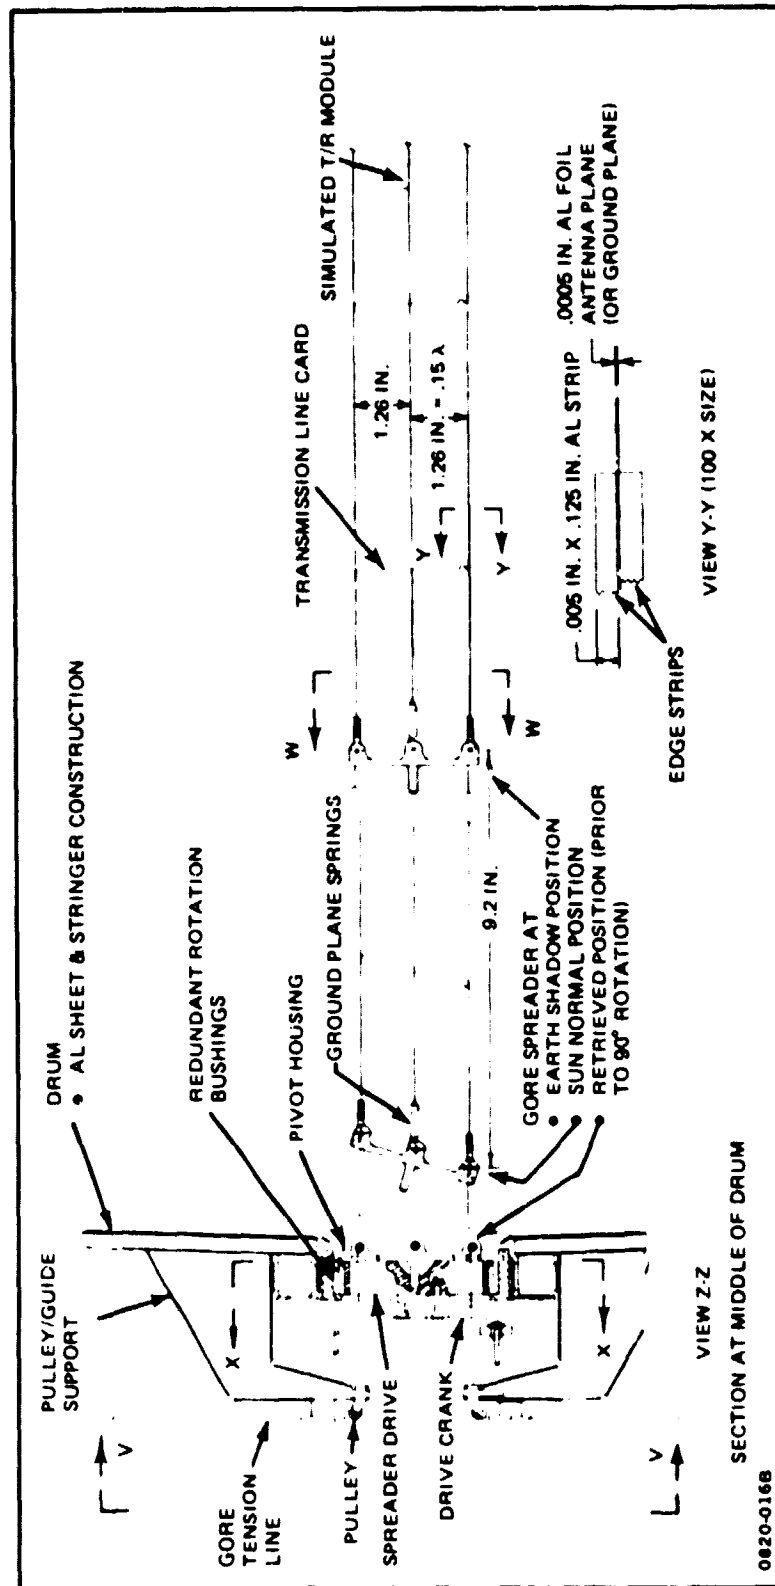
Aluminum Foil Three-Plane Gore (Sheet 2 of 3)
